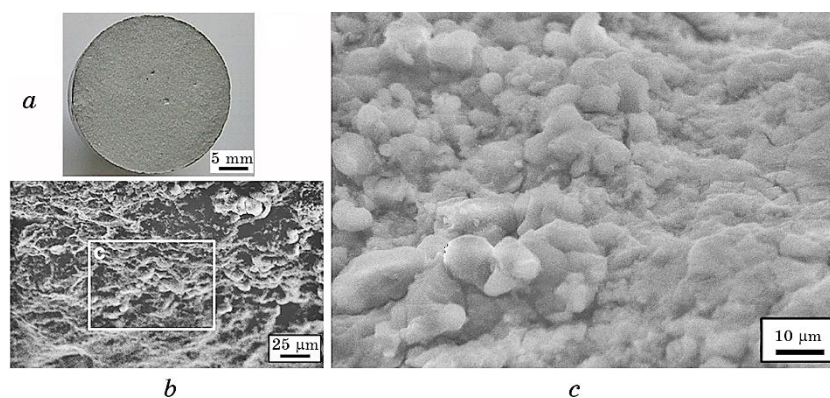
Fracture surface of the tensile sample of QC containing coating on low-carbon steel substrate.
